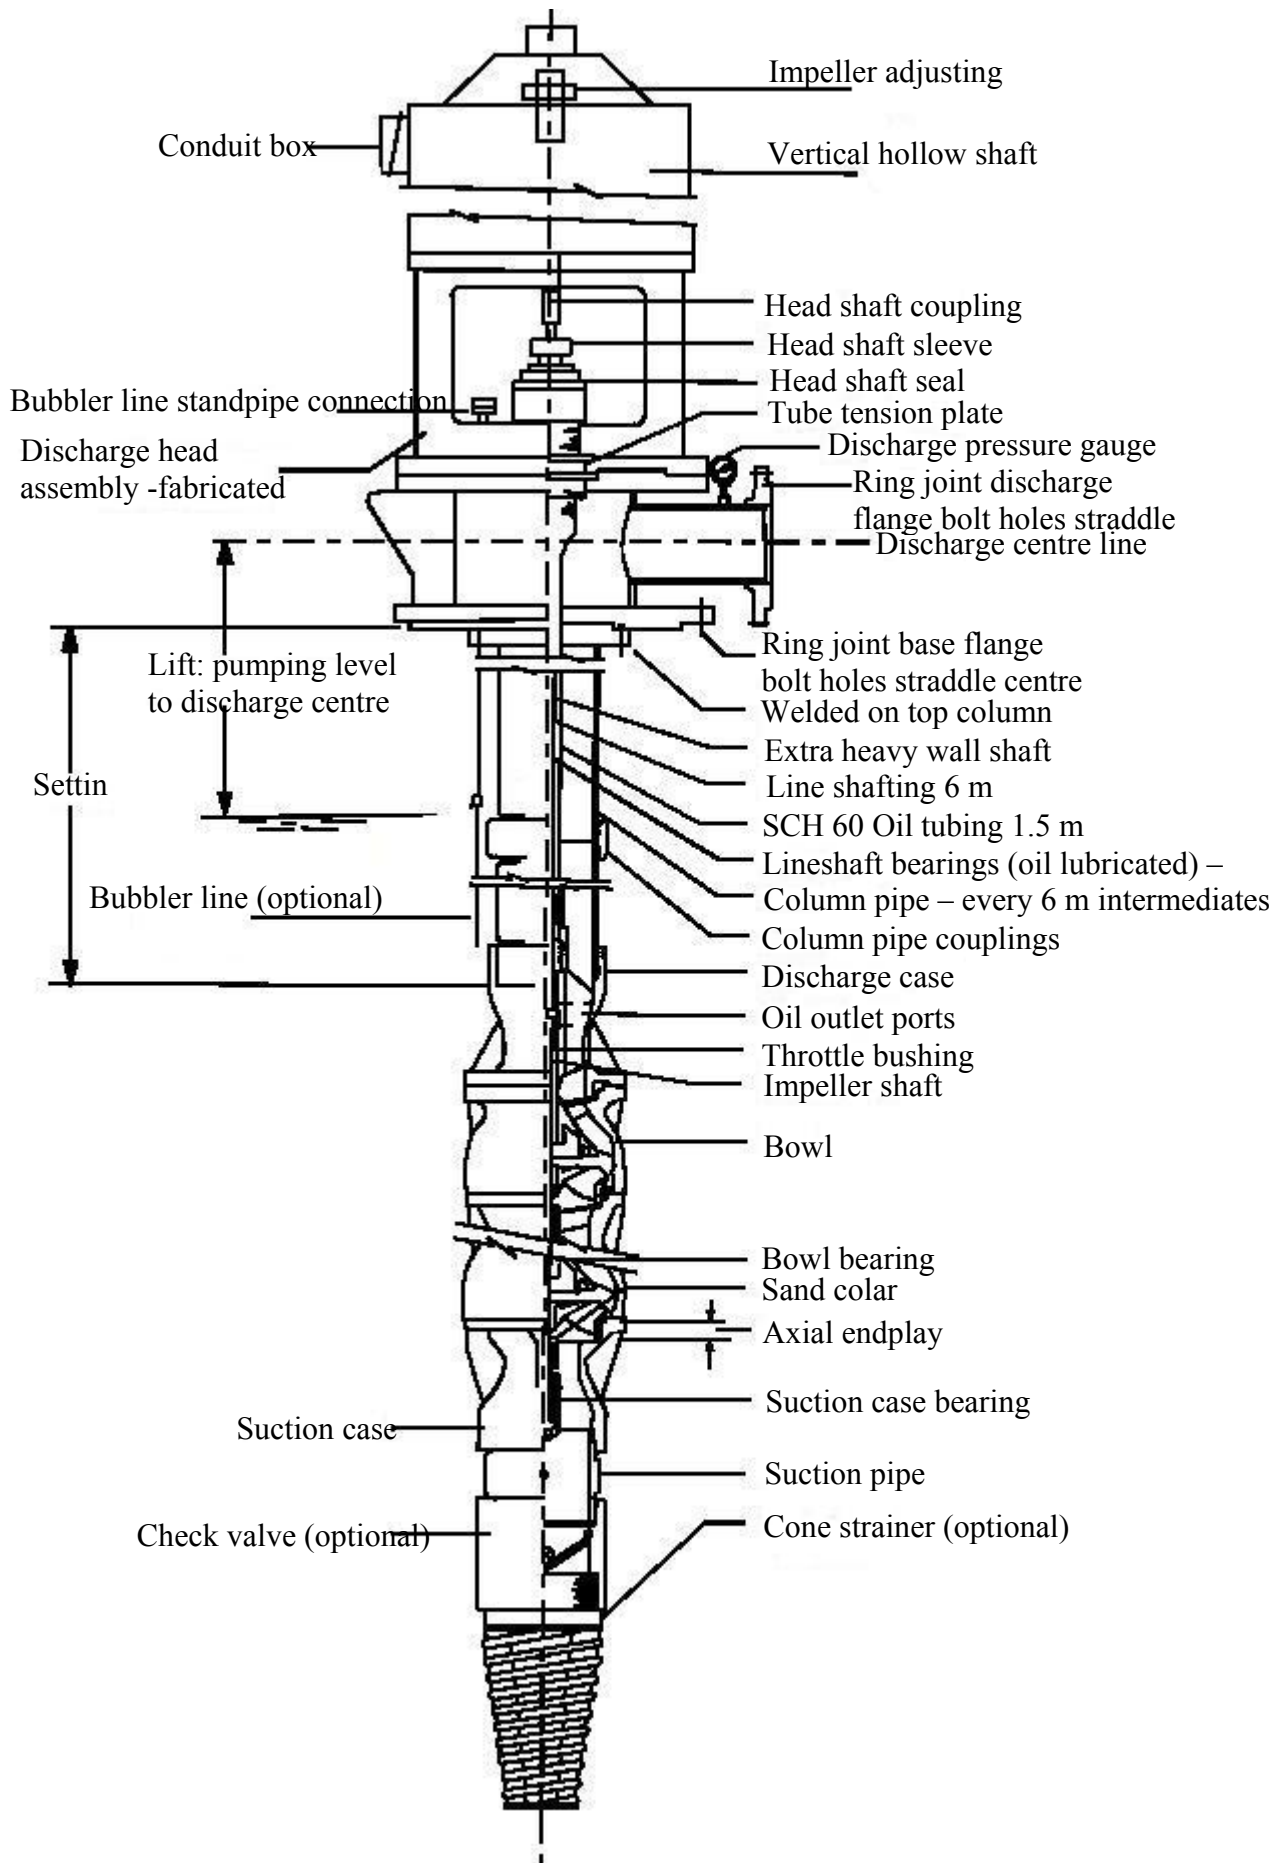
Typical lineshaft turbine pump with an enclosed oil-lubricated shaft [18]
